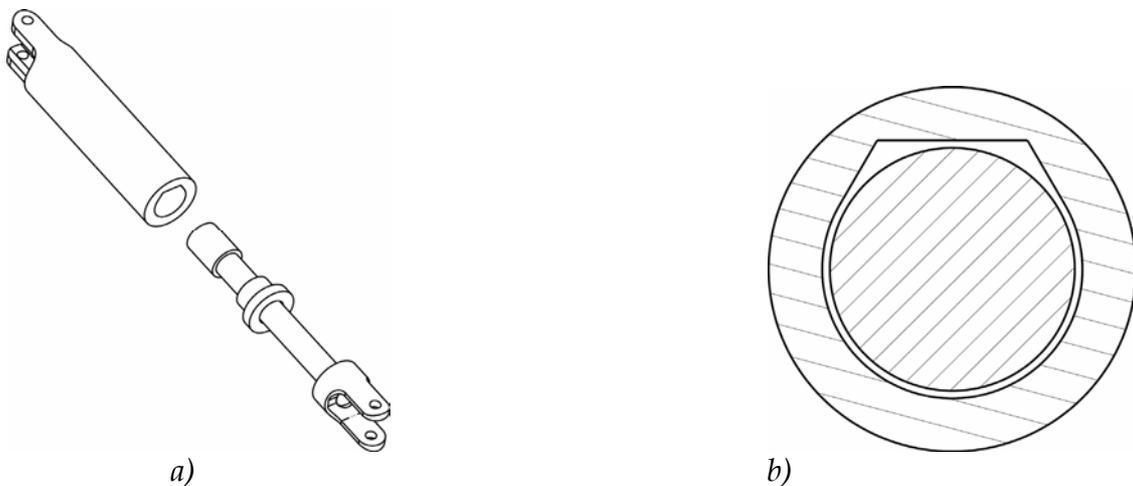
(a) Cylindrical joint with parts of Hooke joints at the ends. (b) A cross section of the cylindrical joint illustrates the shape of the tube to allow bridging
